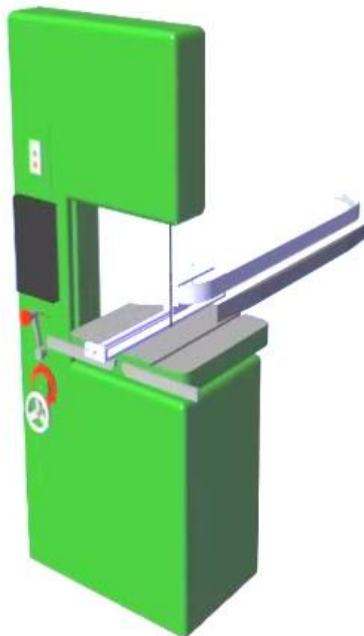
Linear saw cutting direction in the vertical moving saw tool. (Designed by Grafitor ®)
